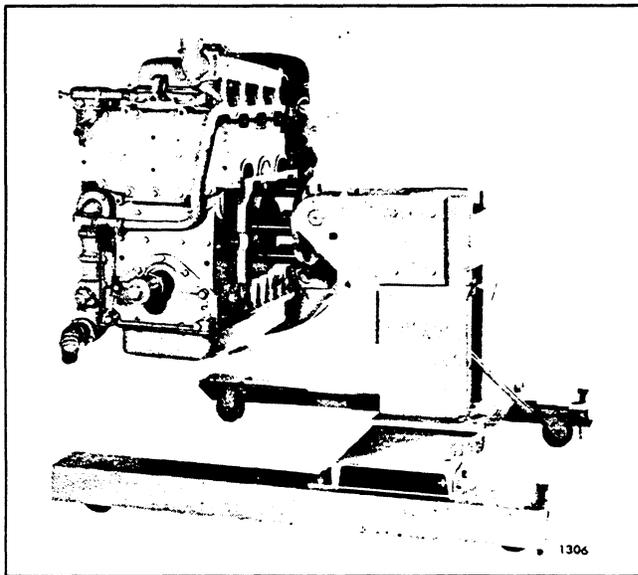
Engine Mounted on Overhaul Stand (J 6837-C) and Adaptor (J 8196)
